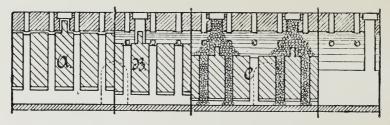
Arrangement for filling Chambers of Ring Kiln.
